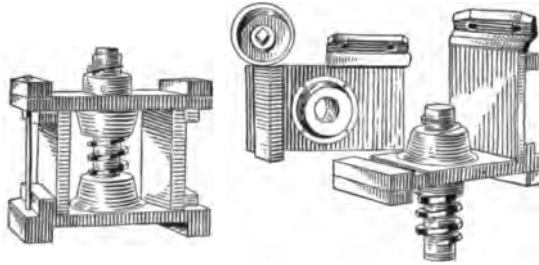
ASSEMBLED AND DISASSEMBLED VIEWS OF WORM PATTERN
